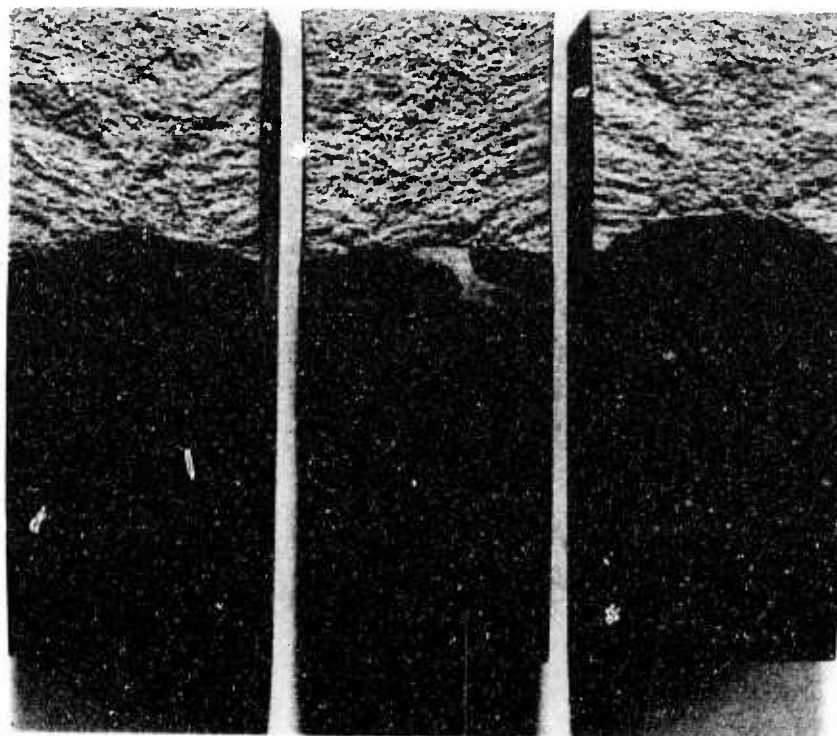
Fracture Surfaces of ASTM A-286 at 4 K
